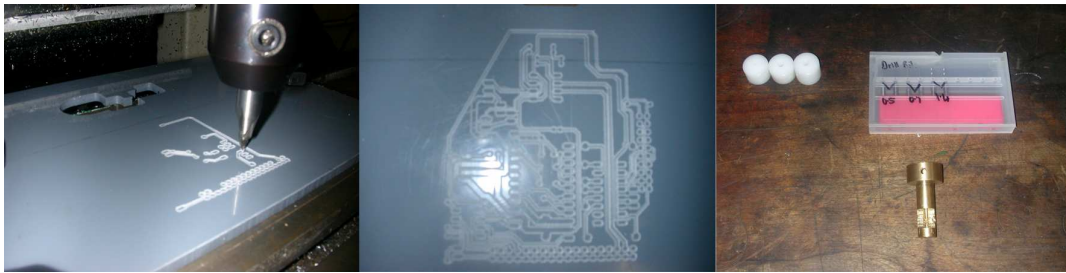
BOARD MANUFACTURE: TESTING
